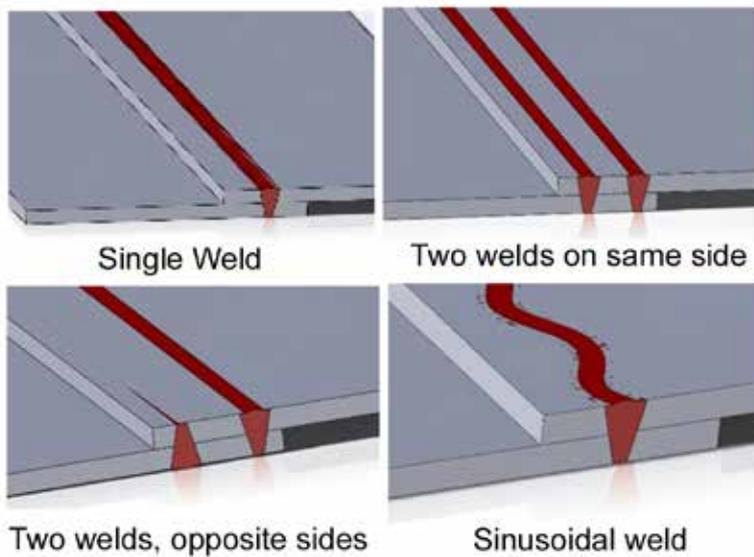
Possible weld configurations for titanium skin lap joints.
